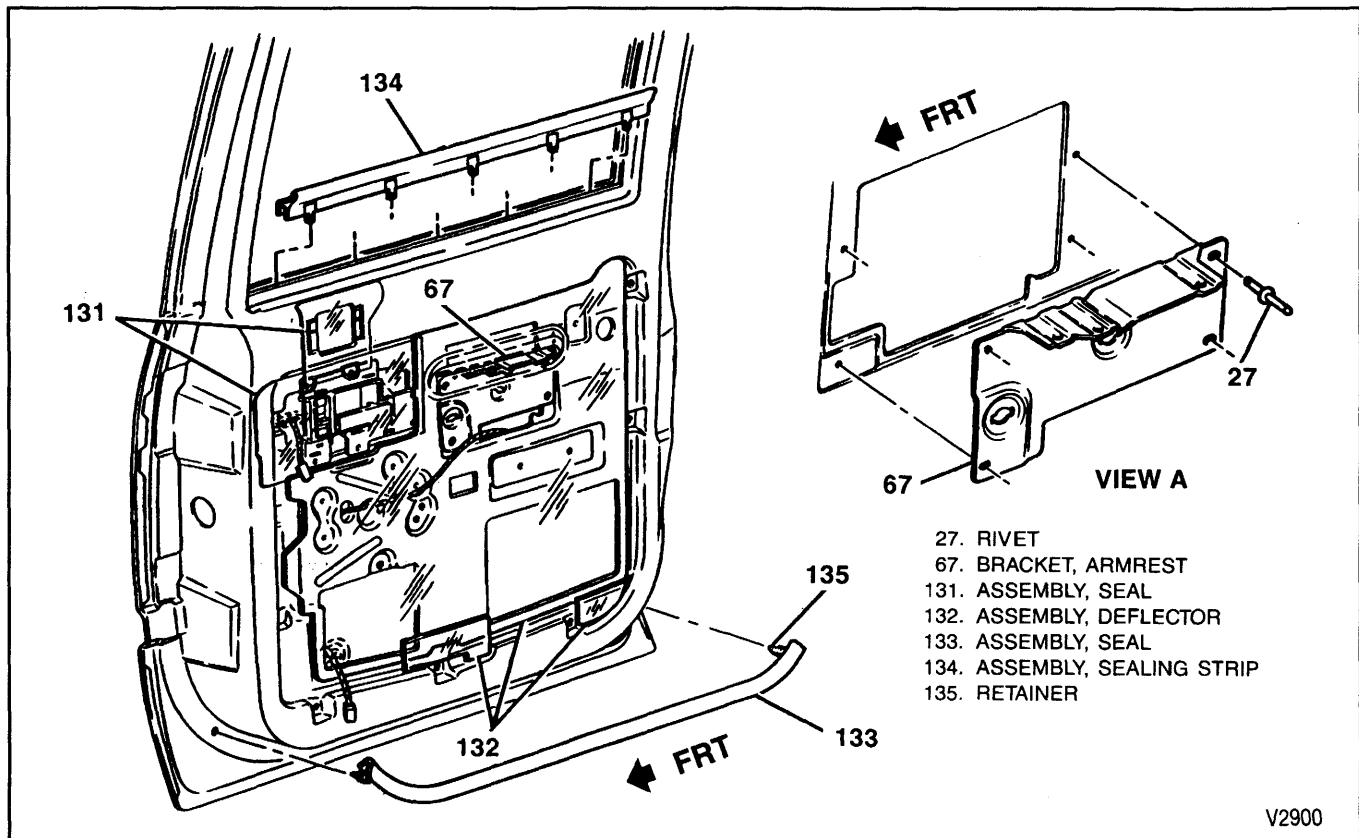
Rear Side Door Outer Belt Window Seal and Lower Door Seal Assembly
